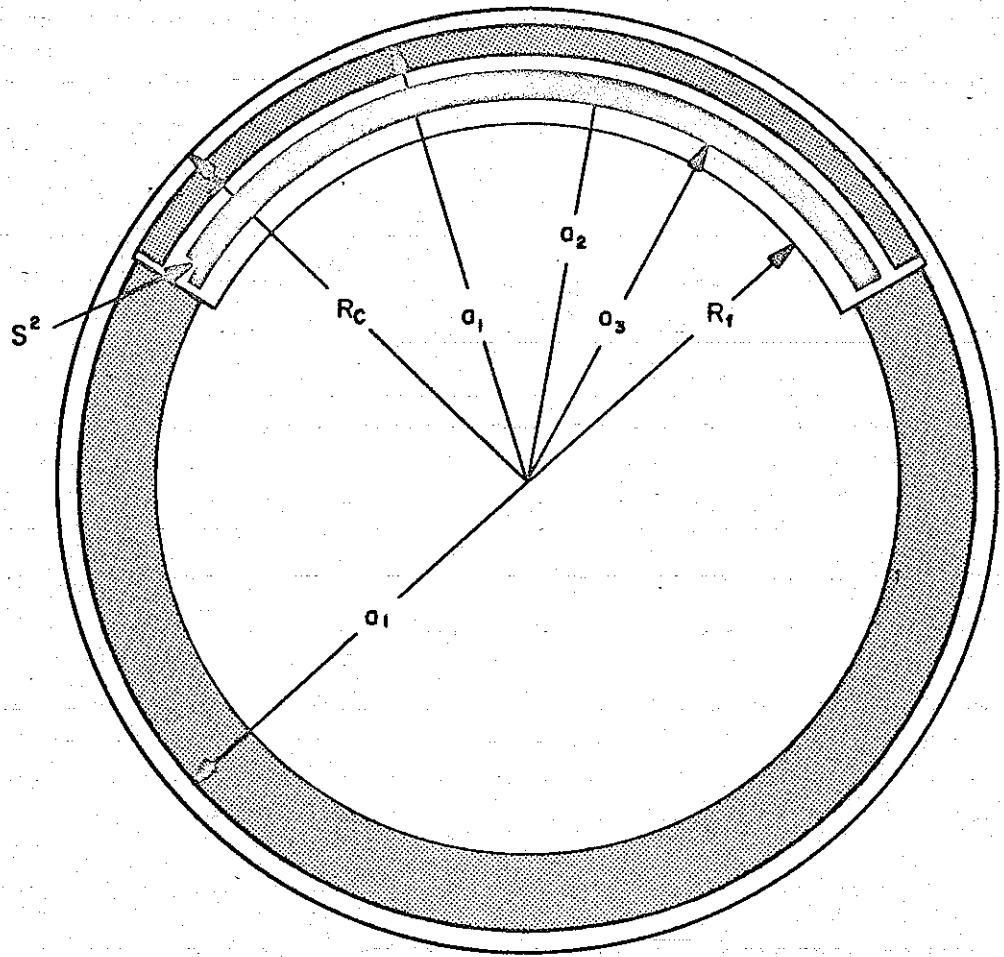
Cross-sectional view of center section of workpiece -- large diameter phenolic flyer plate experiment.
